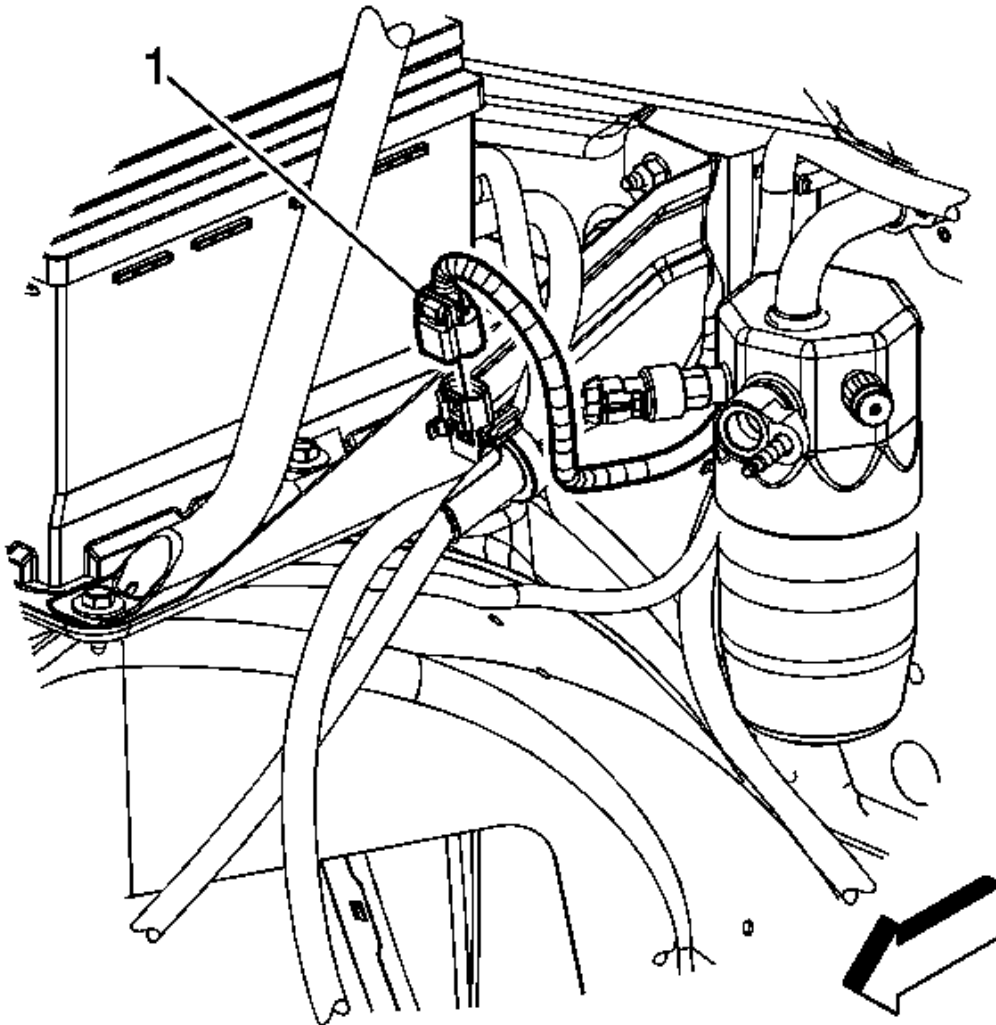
View Of Engine Harness Electrical Connector & Battery Current Sensor
